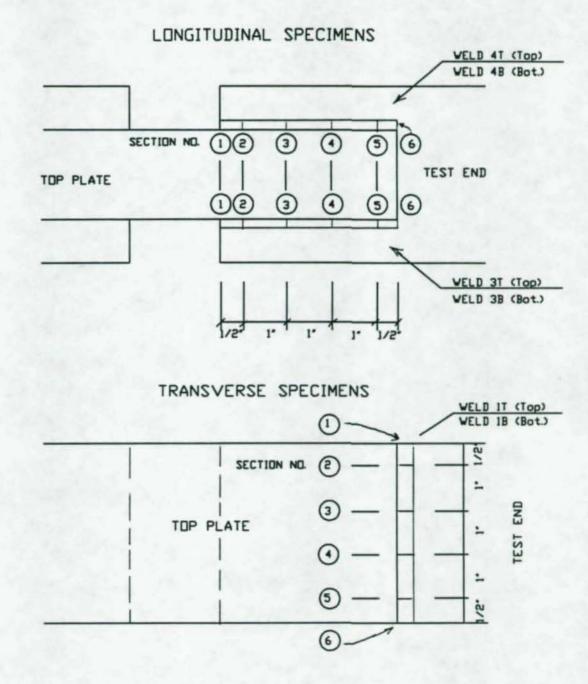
Location of Weld Leg Size Measurements
